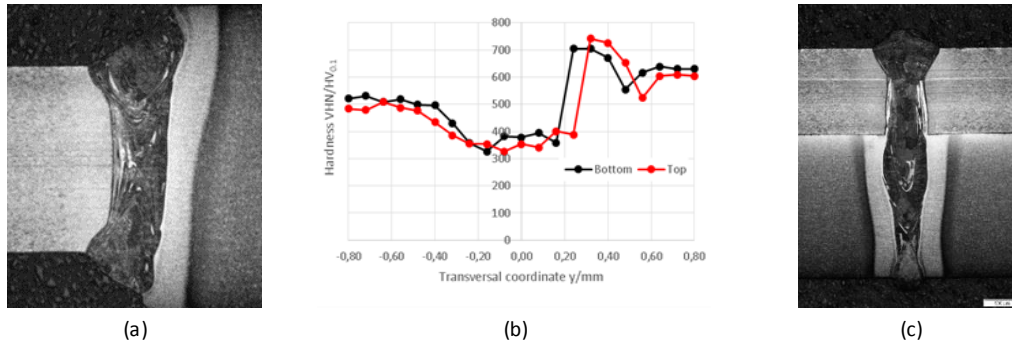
Dissimilar weld between 1.4678 and press hardened 1.4034: (a) Macro section of a square butt joint (b) hardness plot across the weld zone; (c) macro section of an overlap joint
